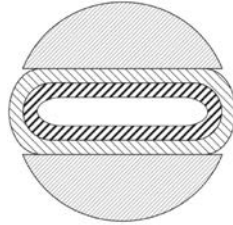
Cross section showing the flattened, reinforced, hydraulic hose and the half-moon steel plates
